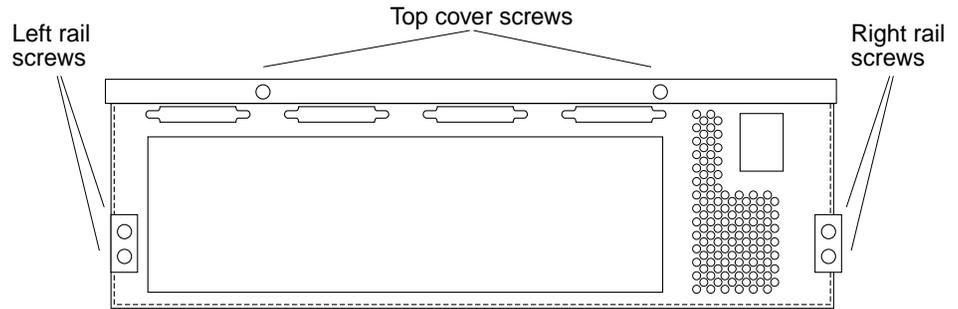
Securing the Tray Assembly in the Cabinet — Rear View
